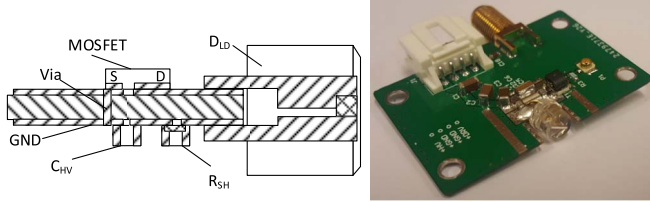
Main current loop PCB cross section (left) and assembled PCB (right).
